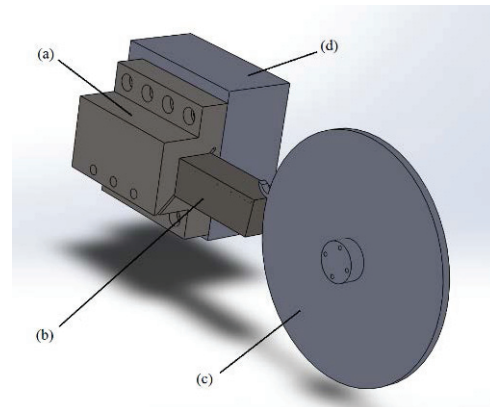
The scheme of the experimental setup (a) collet; (b) solid HSS cutting tool, (c) workpiece, (d) dynamometer.
